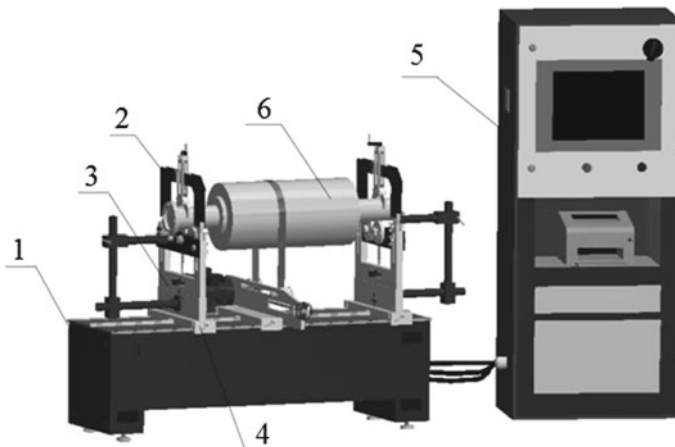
3D model of balancing machine: 1—bed; 2—pedestal; 3—basis pedestal; 4—pedestal plate; 5—control unit, 6—rotor
